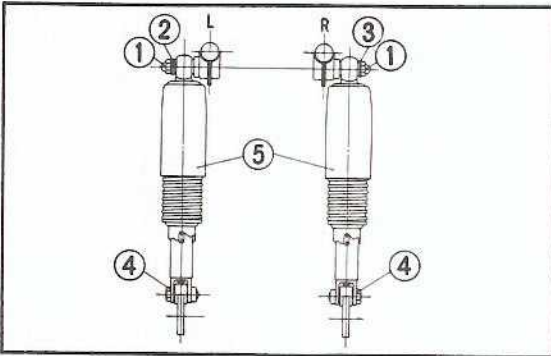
① 10 mm cap nuts ④ 10 mm bolts
